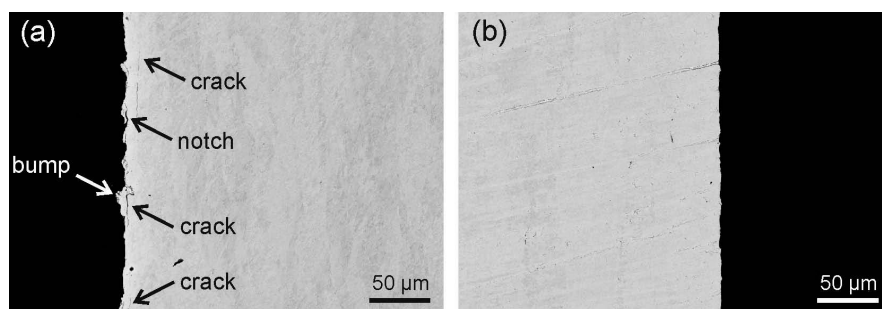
BSE micrographs of the cross sections of flat surfaces machined by peripheral milling (axial) showing (a) bumps and cracks and (b) no defect. The surface quality varied from a face of the hexagonal part to an other due to the tool's degradation during machining of the tile.
